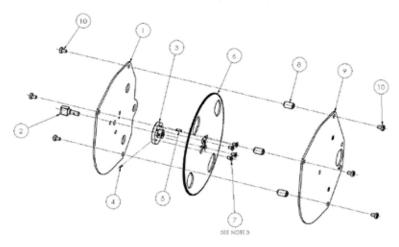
20-Turn Spur Gear Subassembly (Item 17-2)
